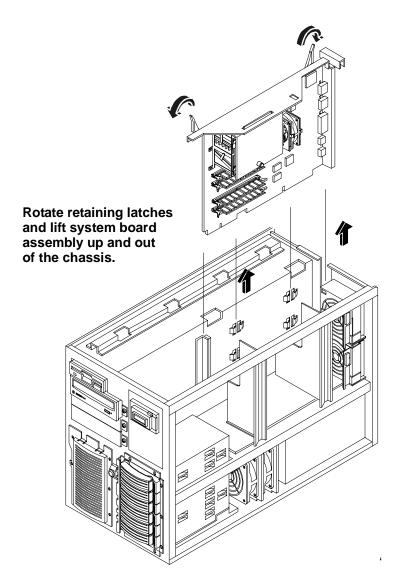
Removing the System Board Assembly from the Pedestal NetServer
